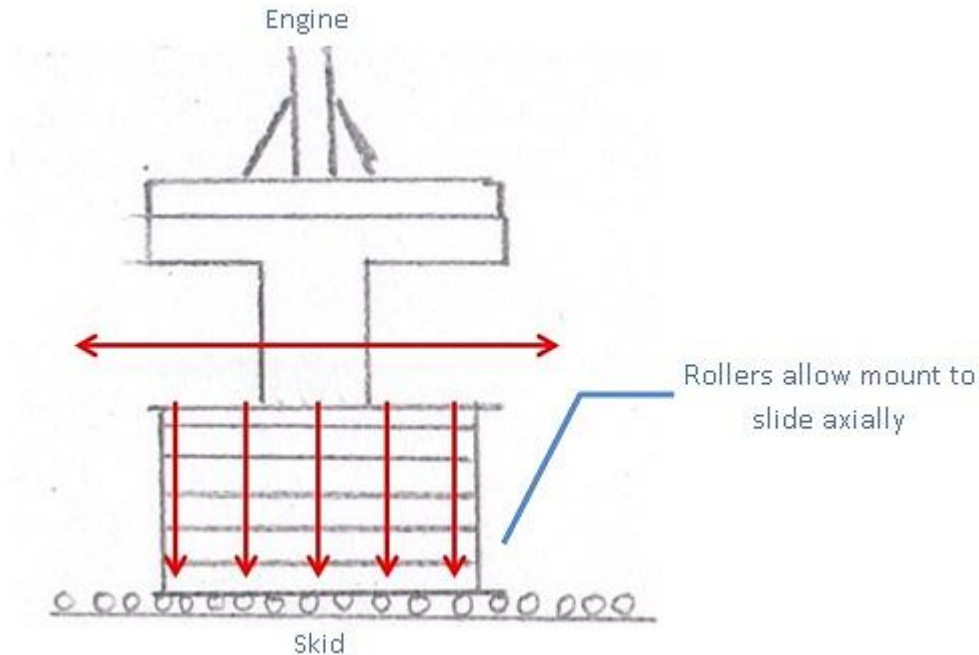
Side view of the current aft-mount. Any expansion or contraction of the engine would be taken into account by the rollers, allowing for a constant load distribution across the spring pack.
